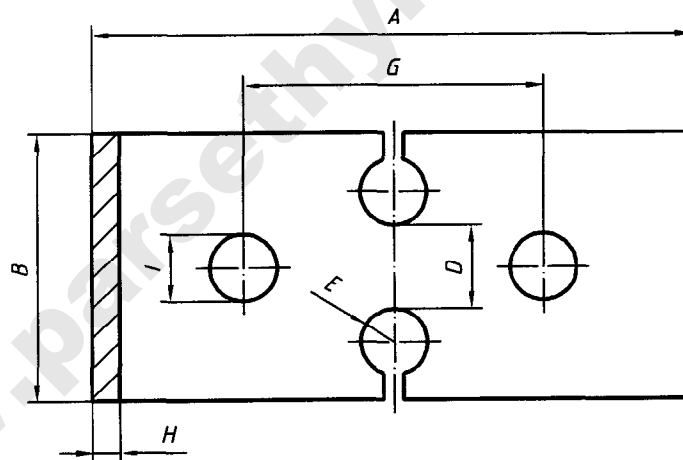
Machined type A tensile test piece (for $e < 25$ mm)
